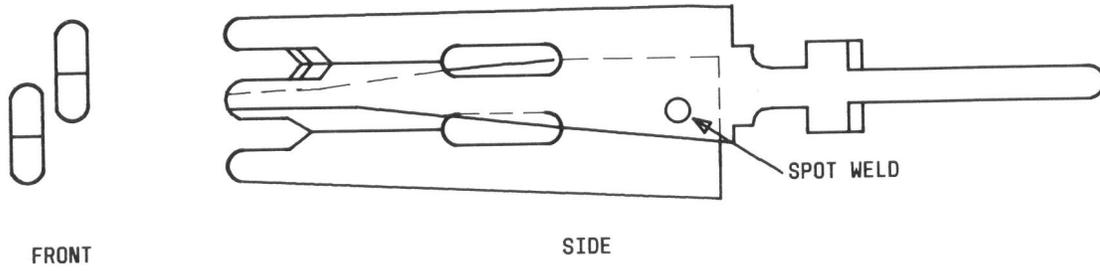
Views of Terminal Used on 78-type Connecting Block
